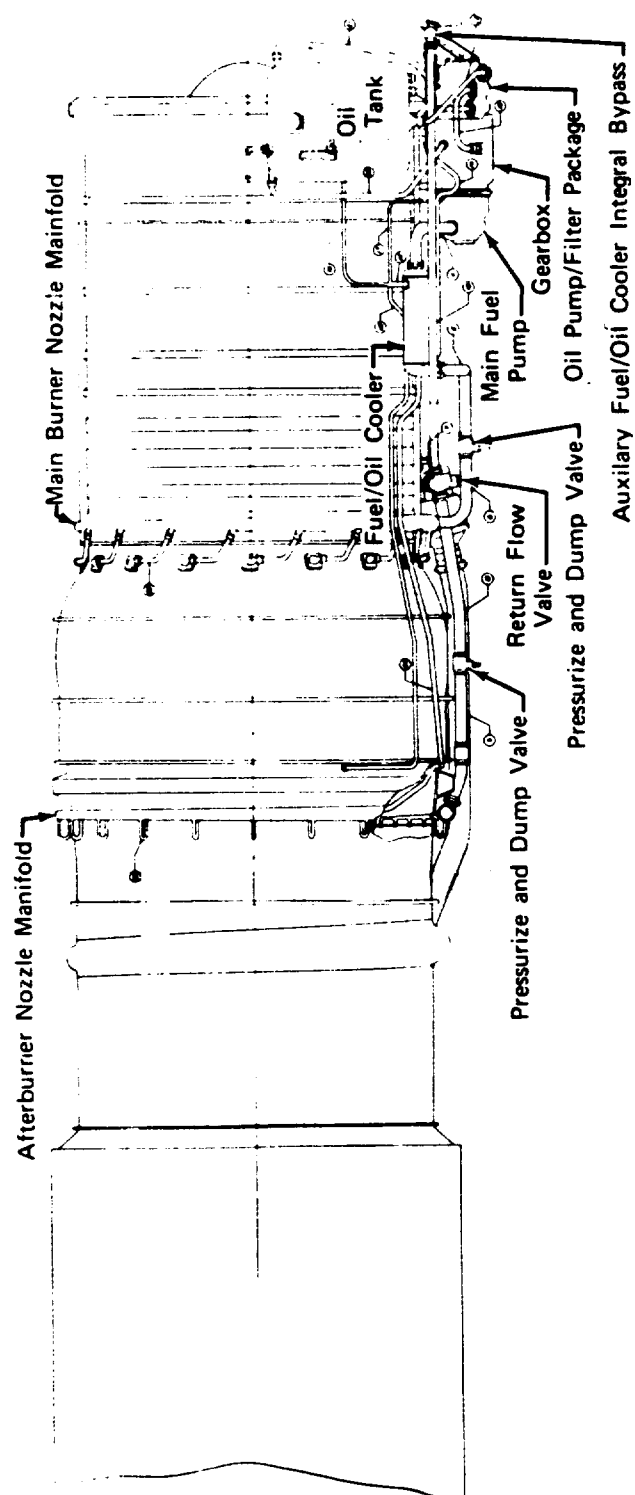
STJ346A Fuel and Lubrication System, Right-Hand Side
